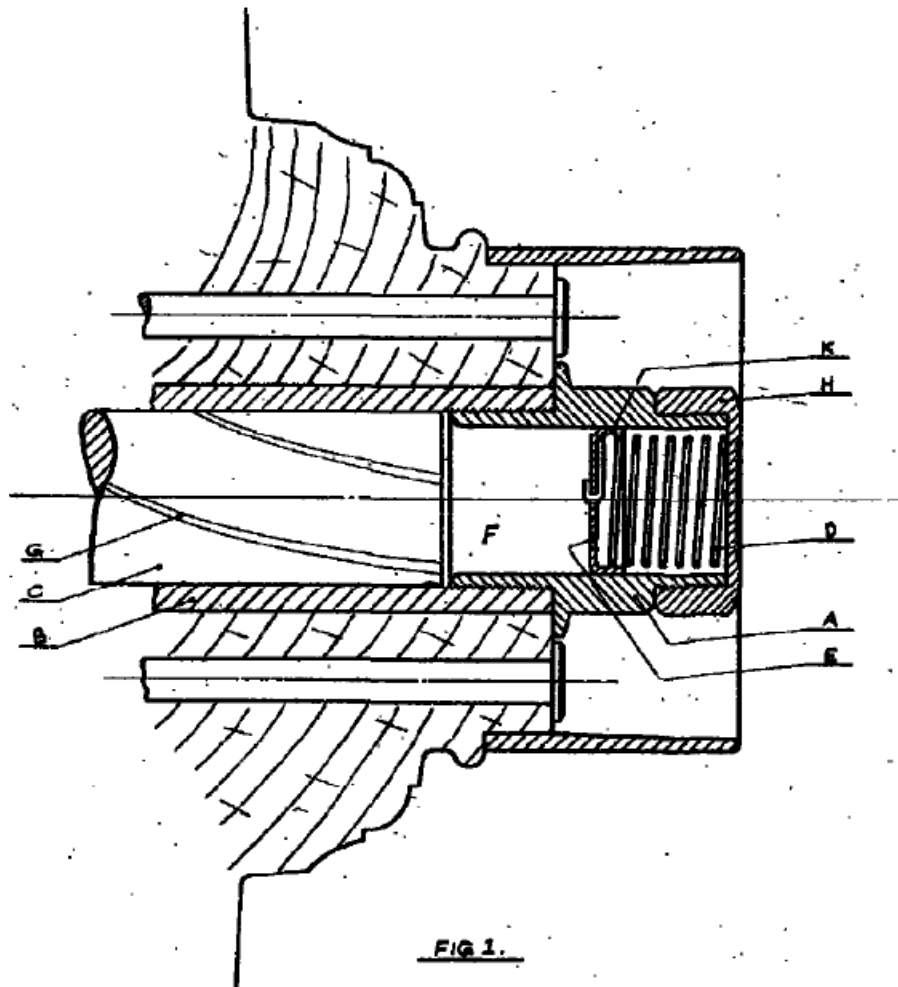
of Panter, above, is a cross-sectional view of a wheel hub bearing assembly.
